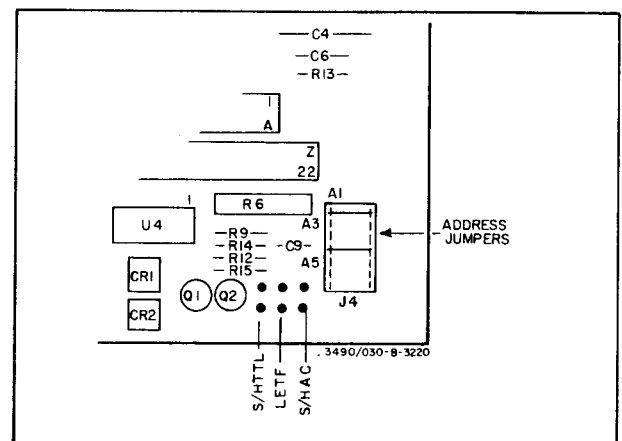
Position of Jumper Wires on Outguard Mother Board Assembly A31.
